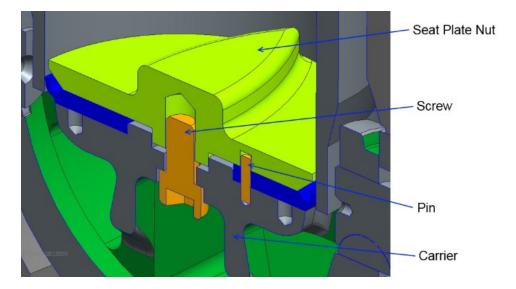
Install the Seat Plate and Seat Plate Nut
